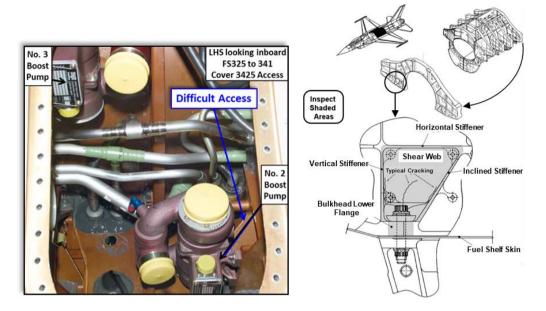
Difficult access to the fracture critical F-16 fuel shelf joint bolt holes (left), easy visual inspection for large cracks in flanges and web of the upper bulkhead (right) [11]
